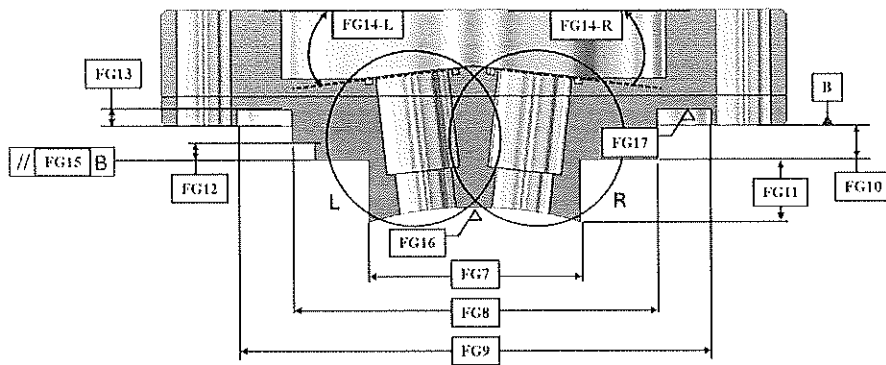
Details of dimensional inspection of the BPM Flange
